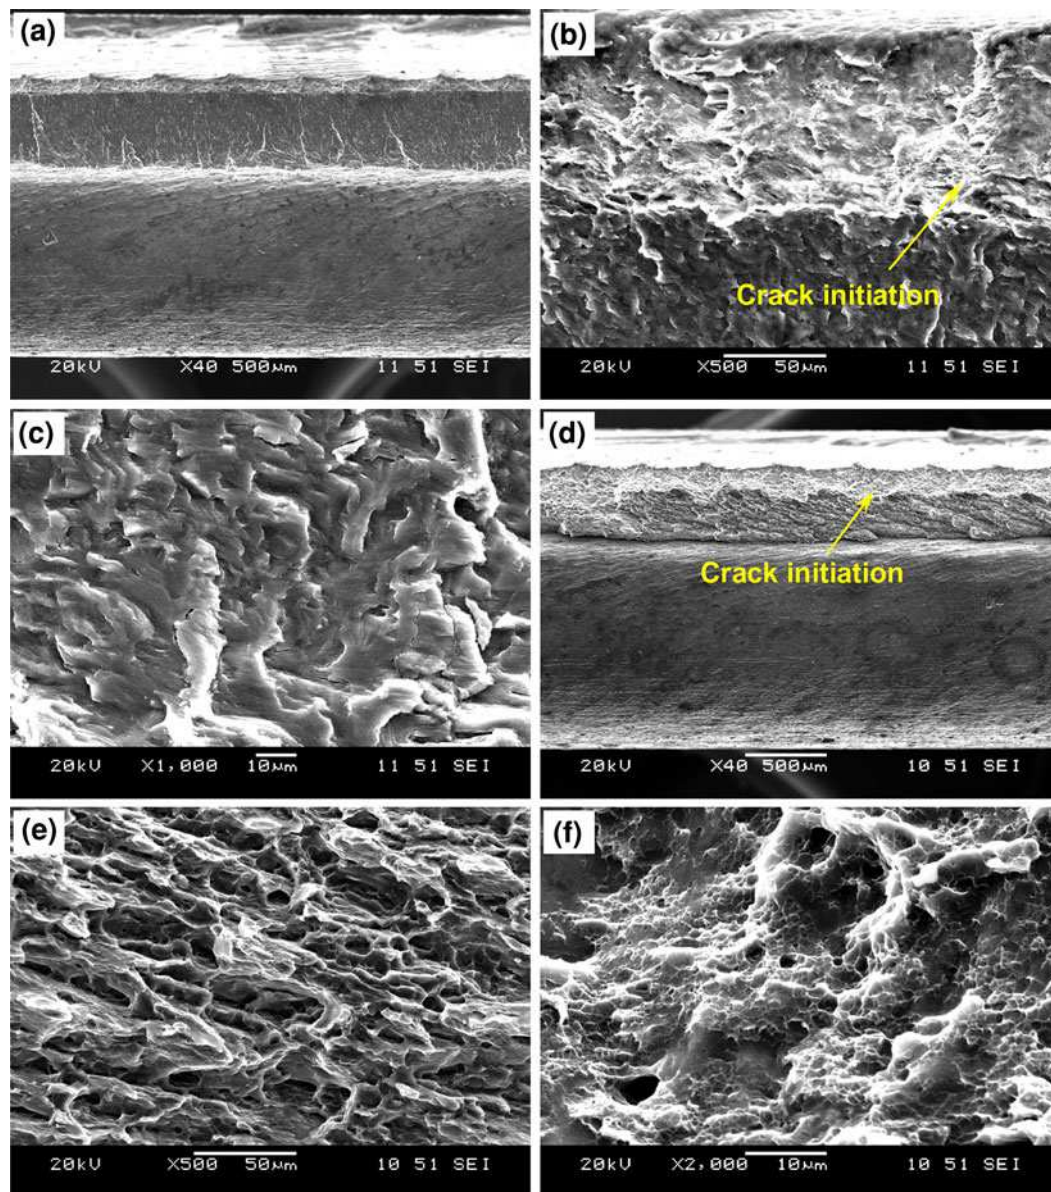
Typical SEM images of the fatigue fracture surface of a FSLWed AZ31B-H24 Mg alloy assembled at a rotational rate of 1500 rpm and a welding speed of 10 mm/s: (a) fatigue fracture surface at a lower  $P_{\max} = 0.5$  kN, (b) crack initiation site at a lower  $P_{\max} = 0.5$  kN, (c) crack propagation region at a lower  $P_{\max} = 0.5$  kN, (d) fatigue fracture surface at a higher  $P_{\max} = 2$  kN, (e) crack propagation region at a higher  $P_{\max} = 2$  kN, and (f) crack propagation region at a further higher magnification at a higher  $P_{\max} = 2$  kN.
